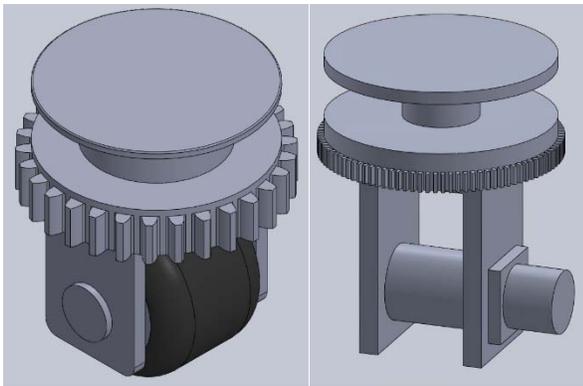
Wheel mounting bracket showing rotational gear interface and space for linear motor mounting
